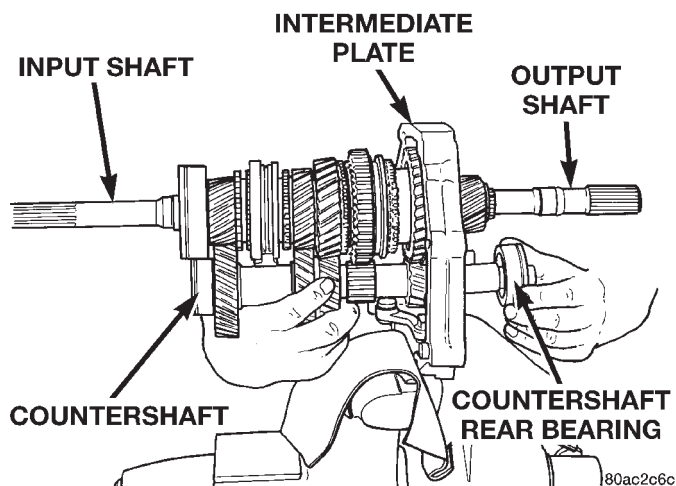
Remove Countershaft and Countershaft Rear Bearing
